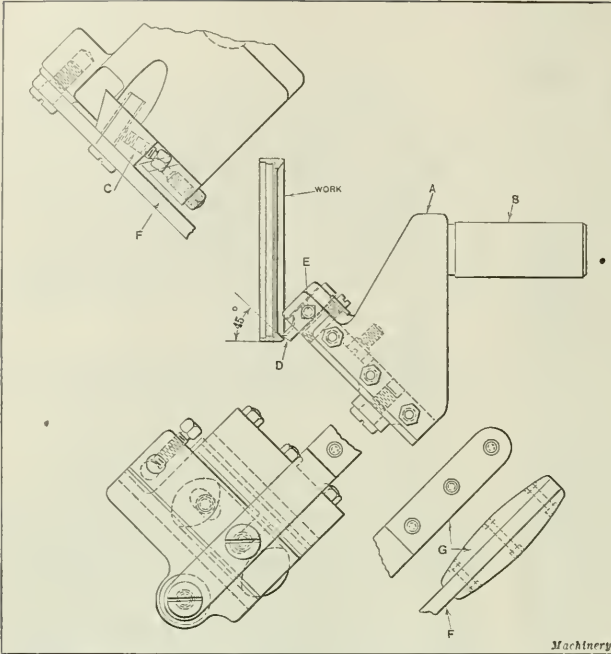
Auxiliary Cross-slide designed for turning a 45-degree Taper
